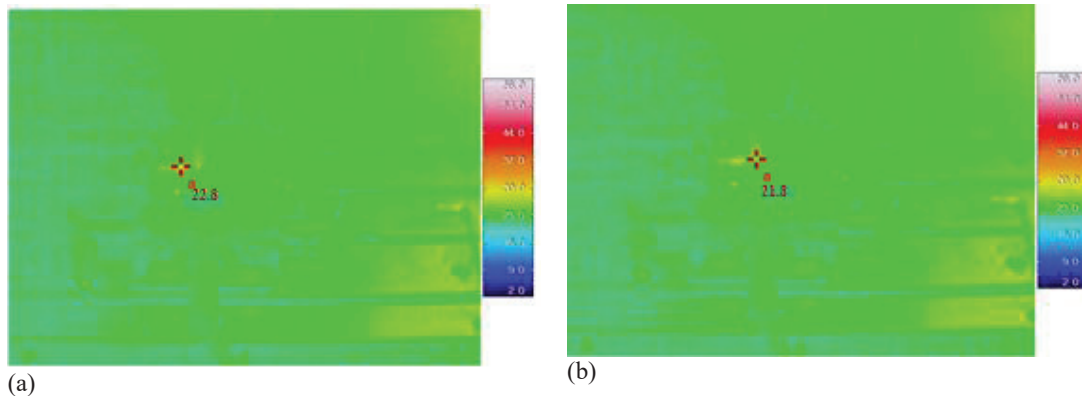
Generated cutting temperature of the drilled hole and drill bit (non-coated carbide) interface arrangement through IT thermal imager camera of (a) after second drilled holes (b) before drilling the third holes (cutting speed of 20 m/min, feed rate of 0.2 mm/rev and drill size of 12 mm)
